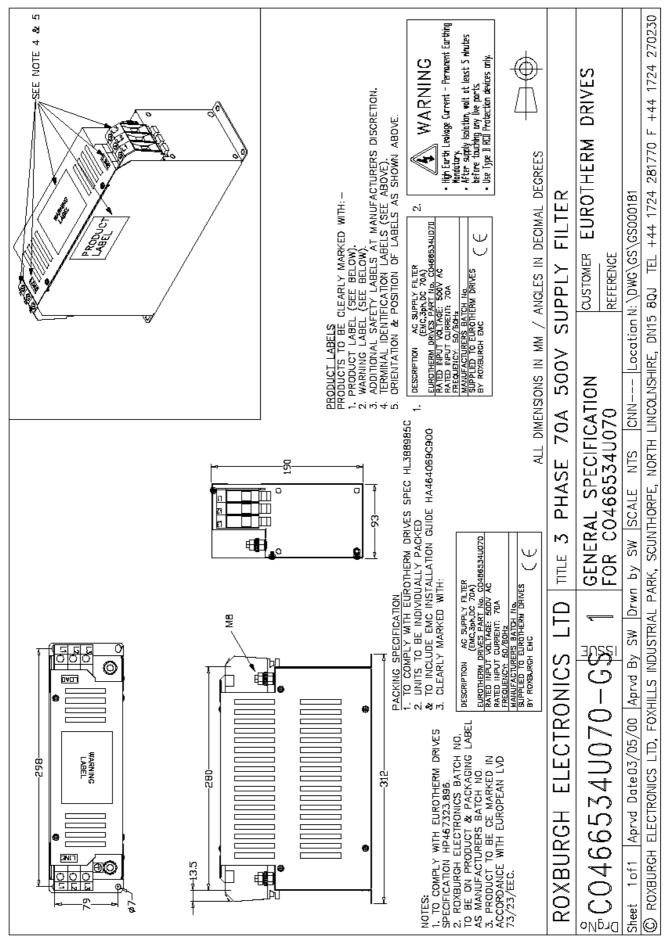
Filter Mounting Details, Part No. CO466534U070 for Frame 2:70 Amp
